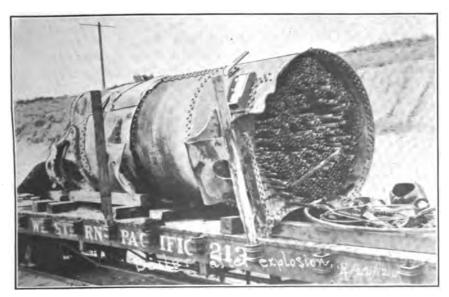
PLATE IX.—Explosion due to excessive pressure and defective barrel.
